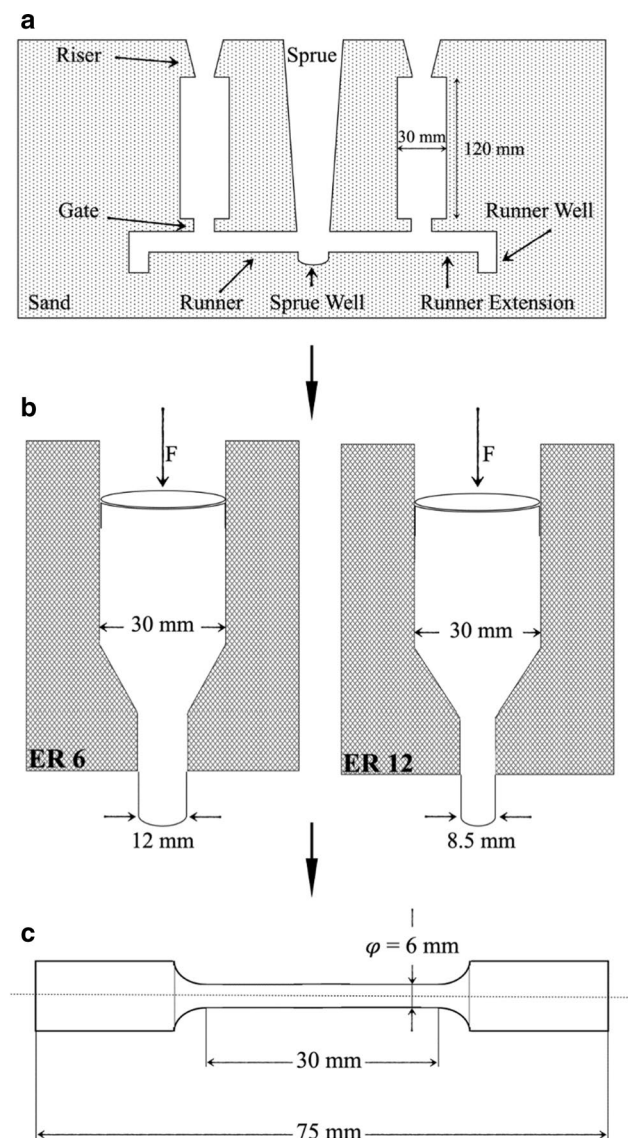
Schematic illustrations of the a sand mold, b extrusion and c tensile test specimen
